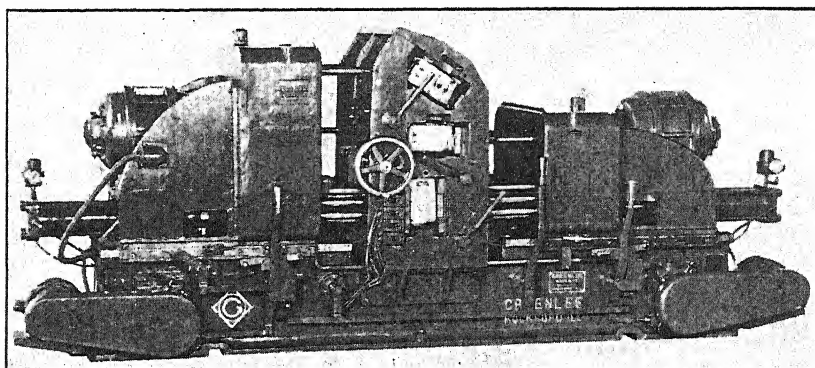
A Greenlee Brothers and Co. Special Two-Way Horizontal Hydraulic-Feed, Multiple-Spindle, Drilling Machine.
